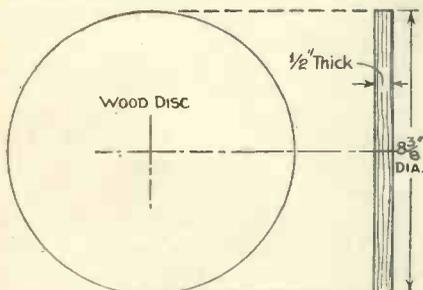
The wood disc supporting the paper drum; this is mounted on a spindle which is centred between two pointed screws in the iron frame.
